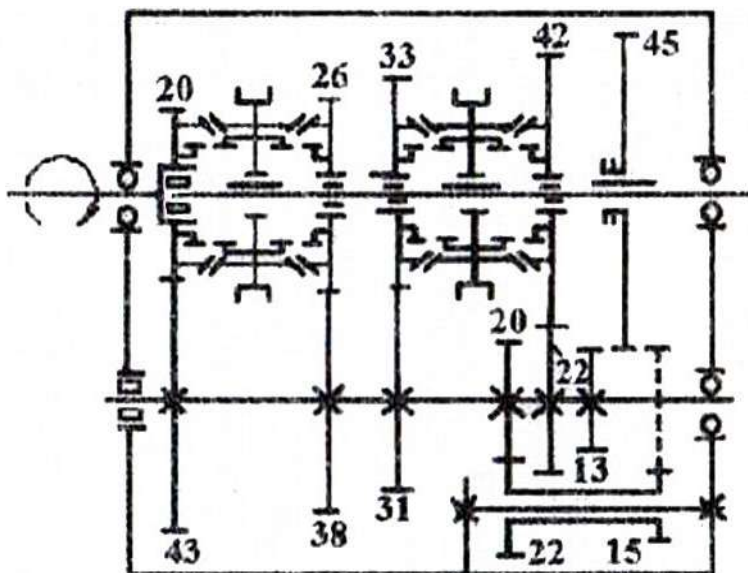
Kinematic diagram of the ZIL-130 gearbox
